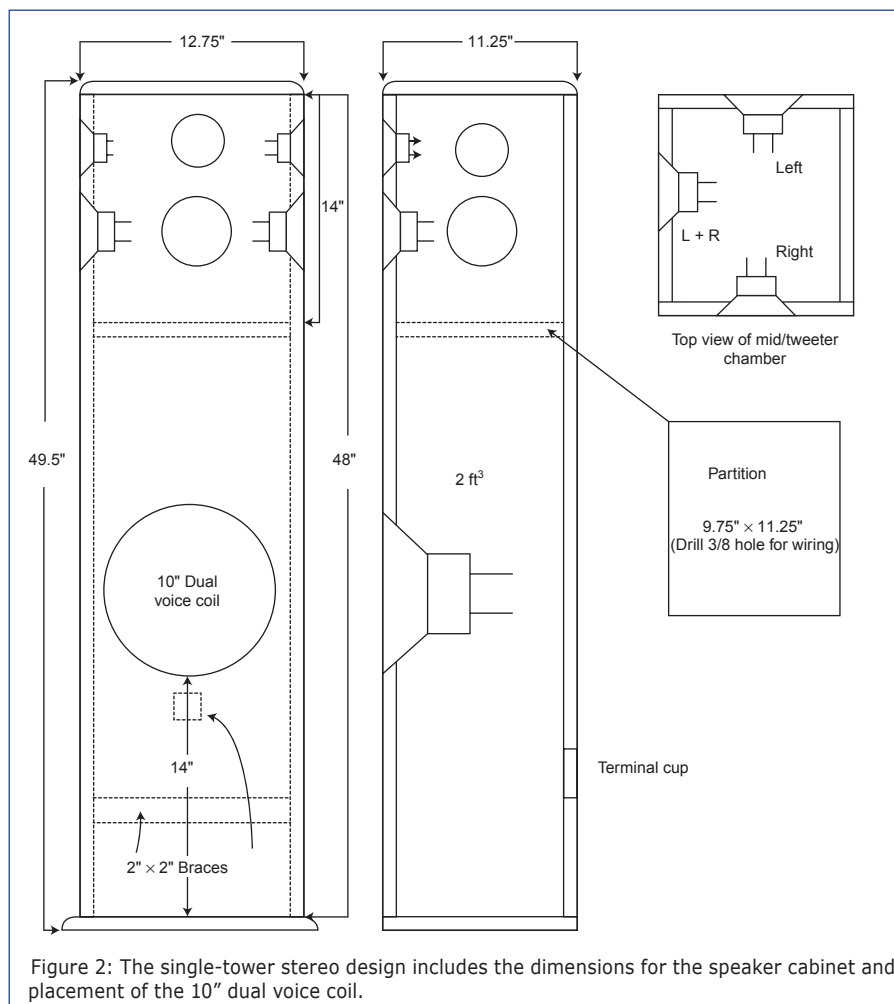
The single-tower stereo design includes the dimensions for the speaker cabinet and placement of the 10" dual voice coil.
